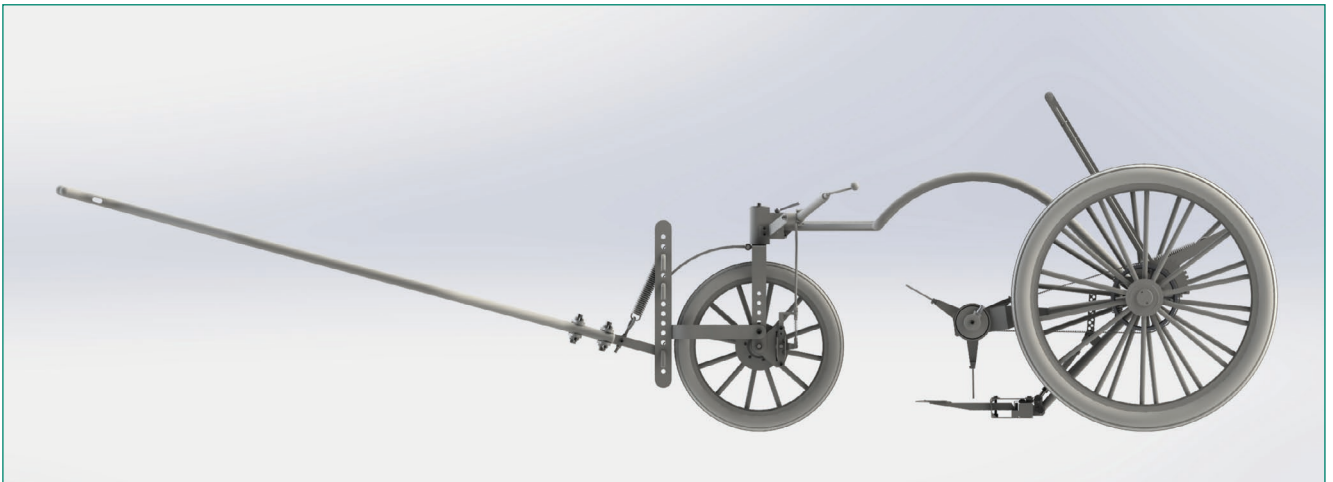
Side view of the horse drawn CombCut coupled to the forecart
